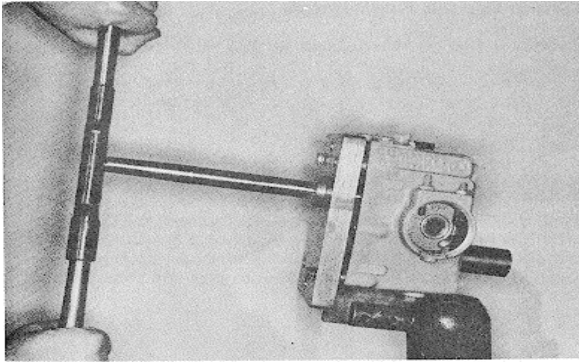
, F514. Reaming drive shaft bushing with ST-490
